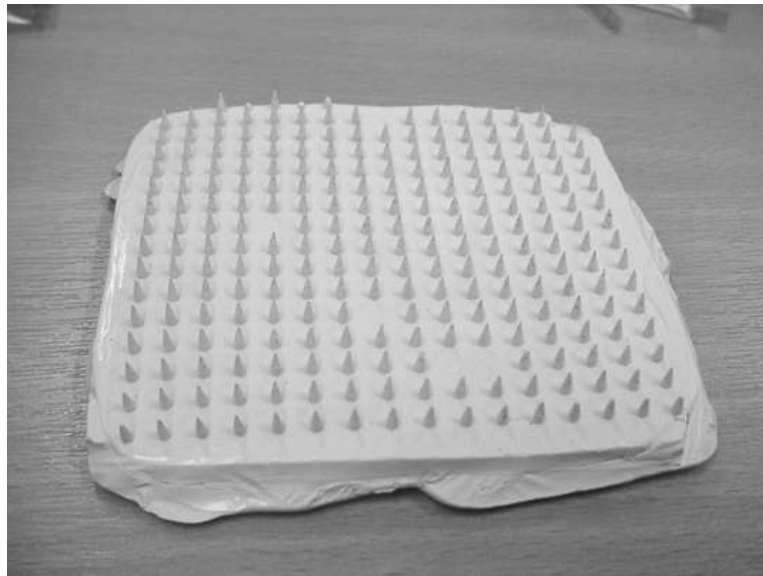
Ceramcor moulding trial showing >95% pin formation due to vacuum
